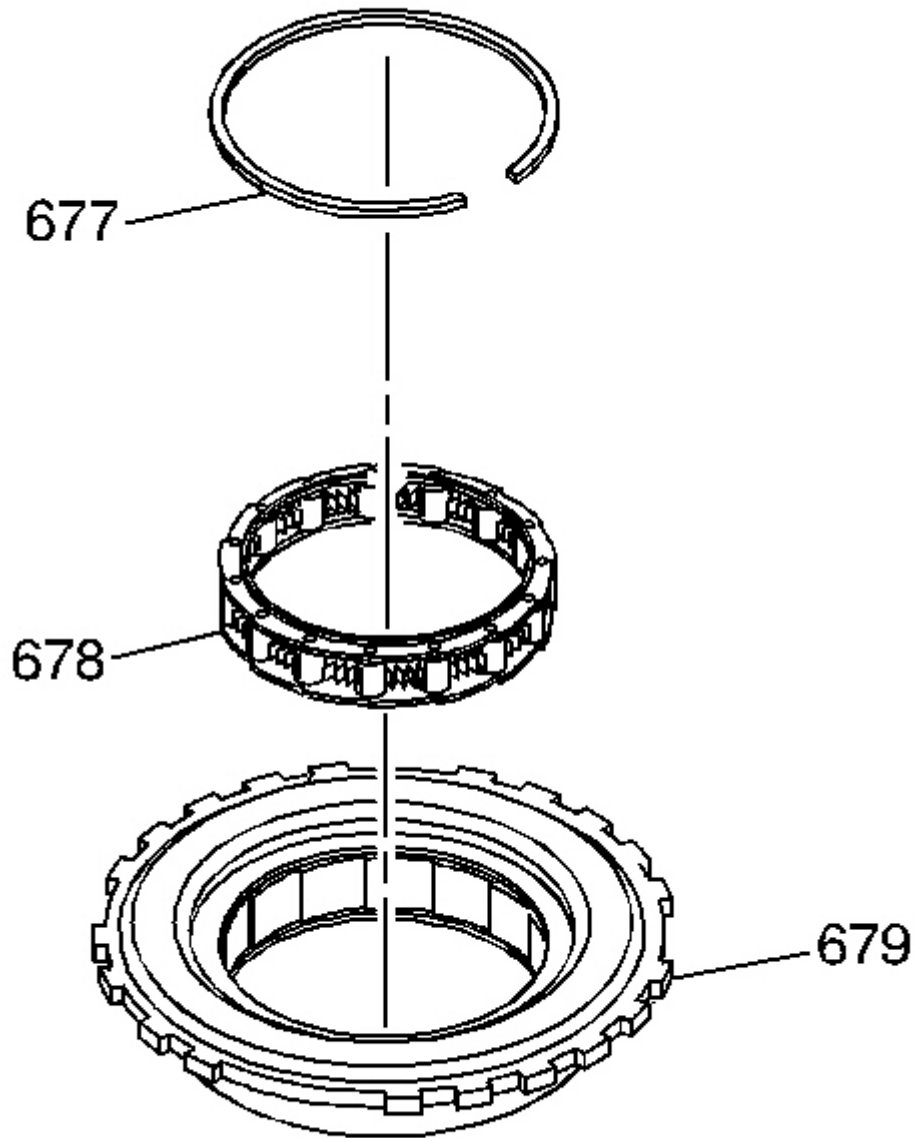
Identifying Low And Reverse Roller Clutch Assembly
